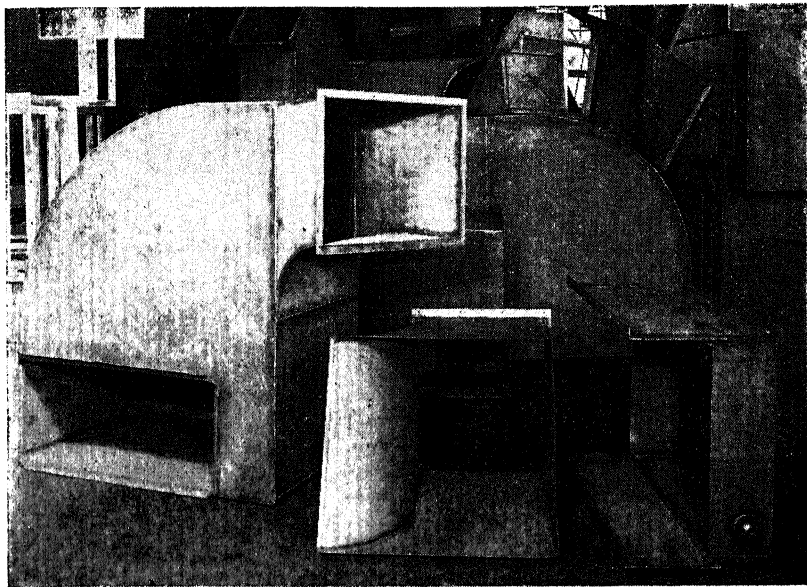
A group of air duct connections welded with the carbon arc with tinned copper alloy feeder rod.
